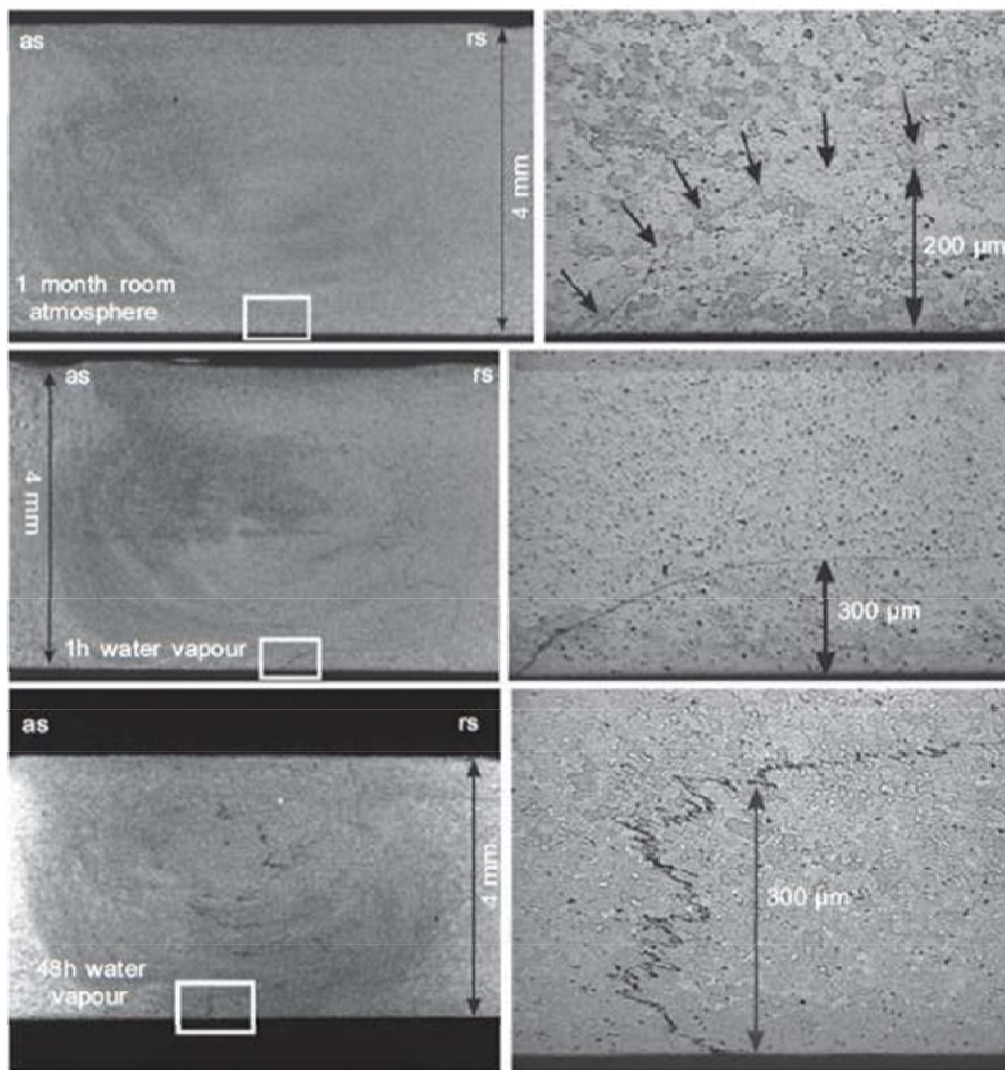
Optical micrographs of root- and nugget flaws formed by natural aluminium surface layers in 6013 T4-FSWs, cross sections [104].
